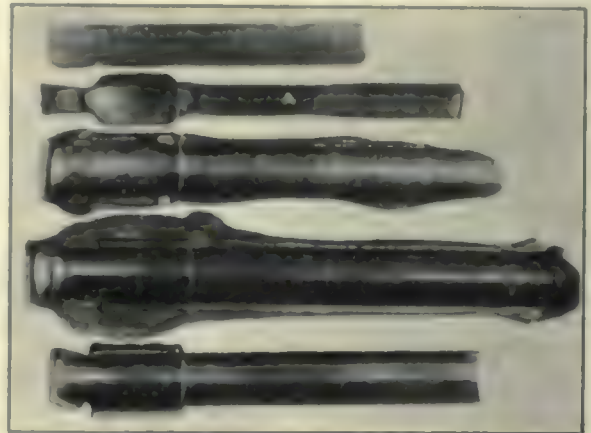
DROP FORGING A TURBINE BLADE FROM A MONEL ROD
